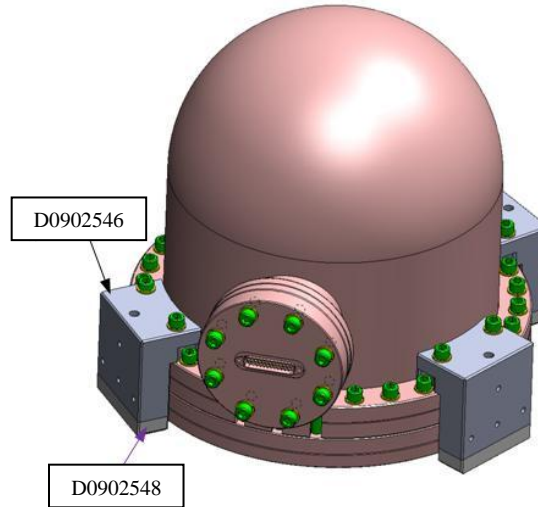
D0900648 Trillium Pod Assembly with (3) D0902547 Trillium Slider Feet on
